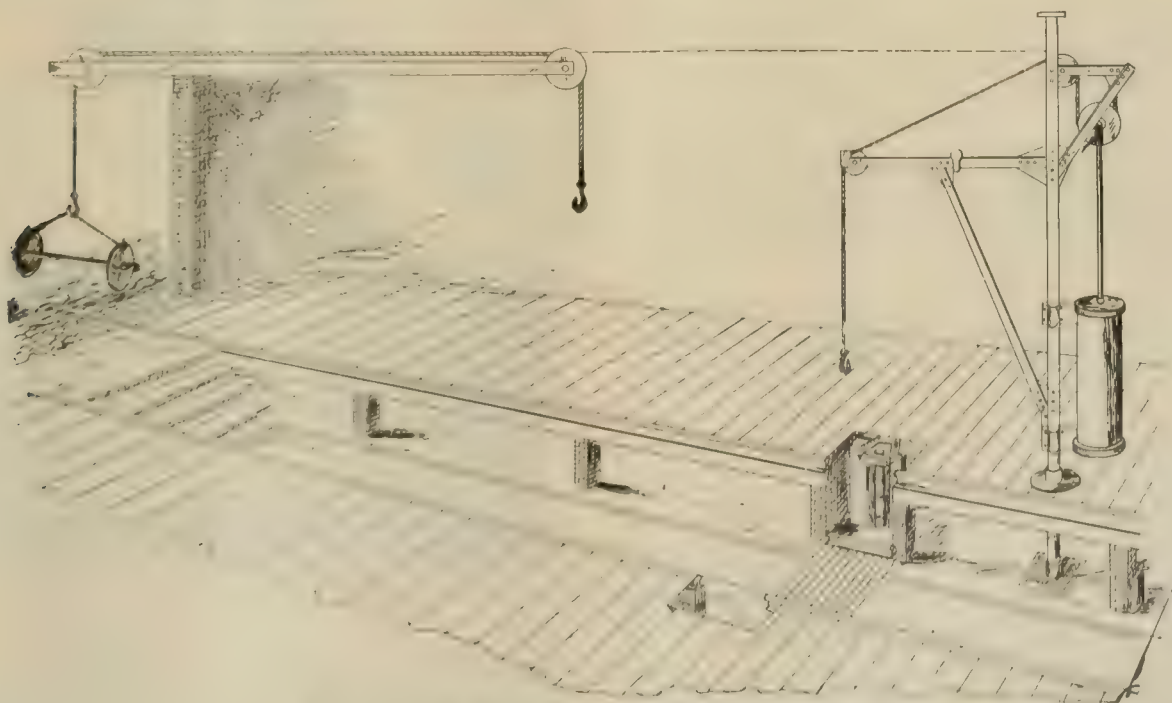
AIR CRANE AND PIT, WITH ELECTRIC ELEVATOR
